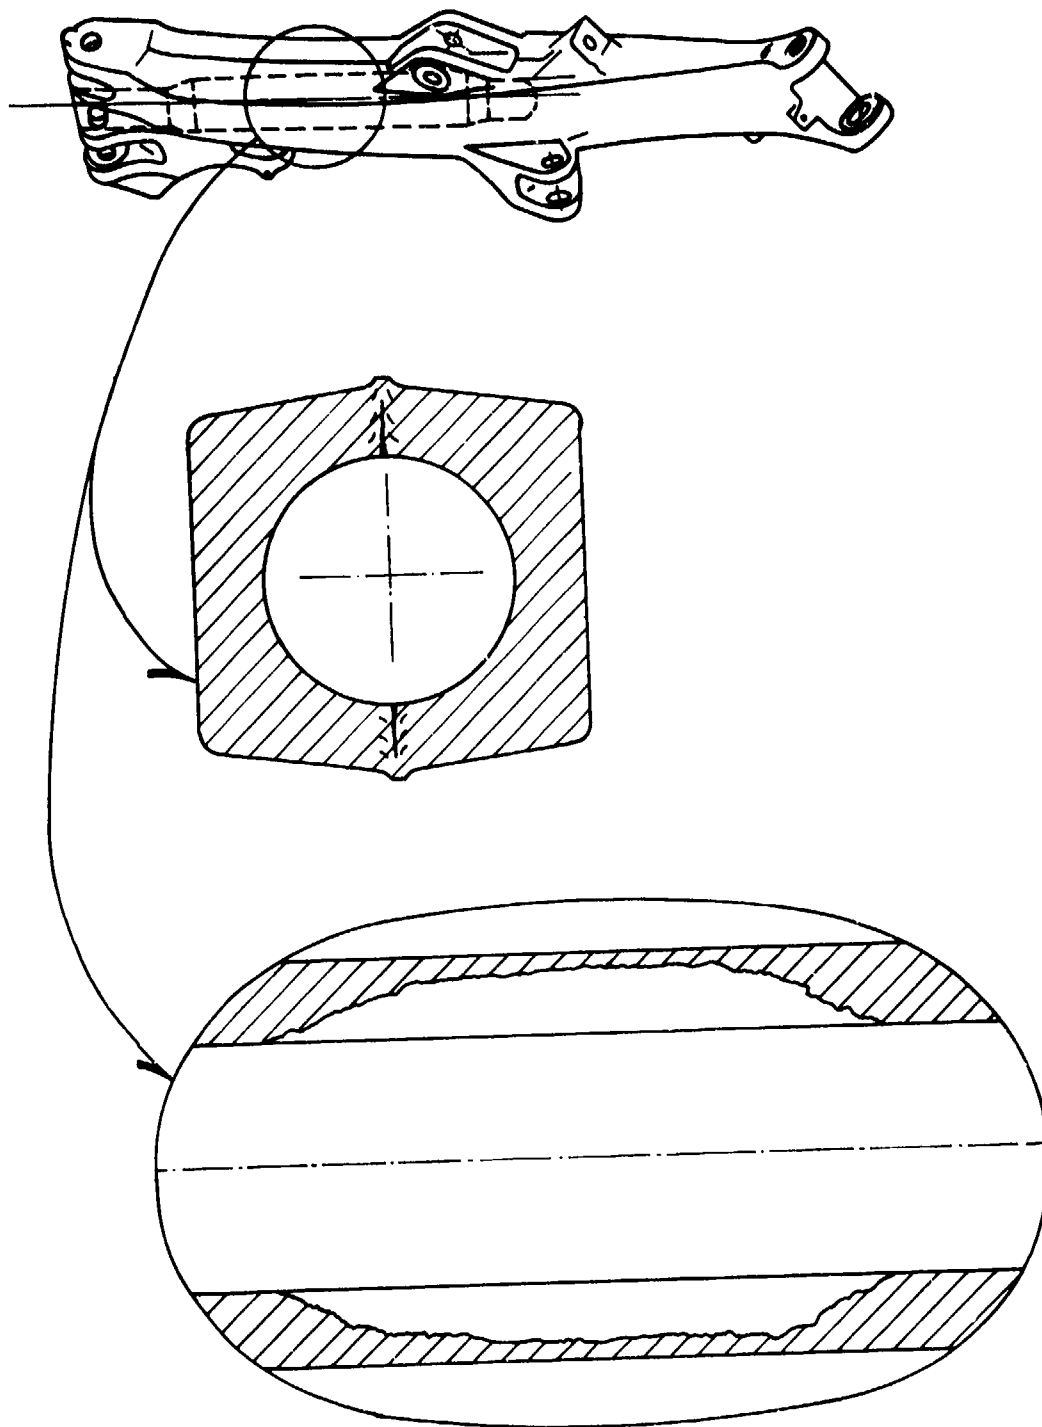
FAILURE DUE TO STRESS CORROSION ON A LANDING GEAR STRUT.
